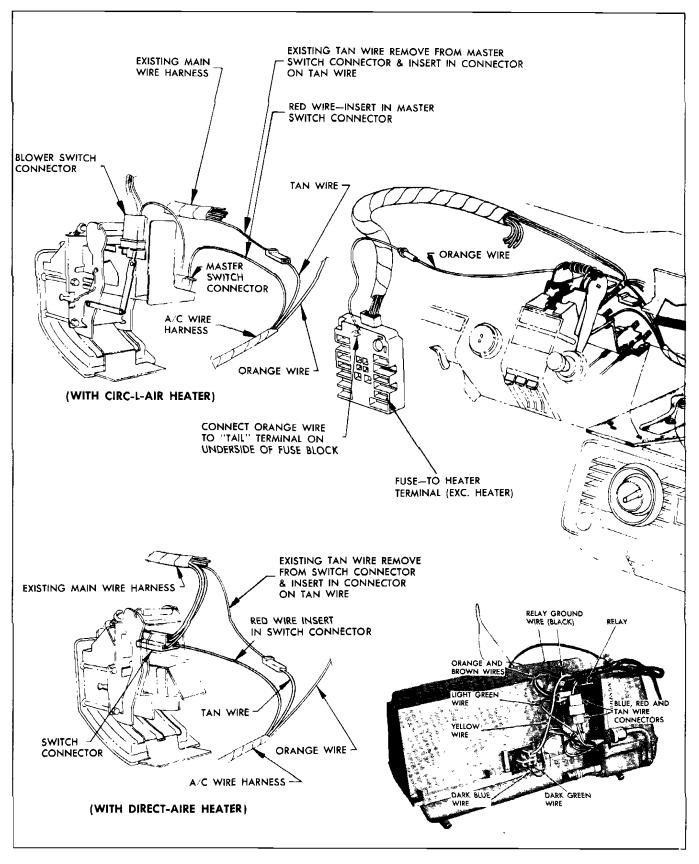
Reference Illustration—Pontiac Cool Pack Electrical Parts
